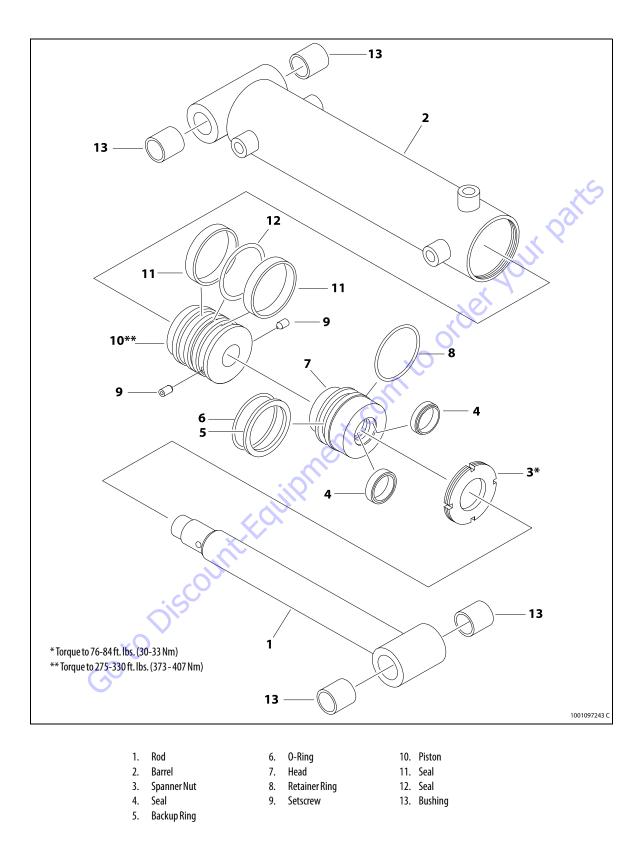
Steer Cylinder (SN 0300142664 through 0300185827)
